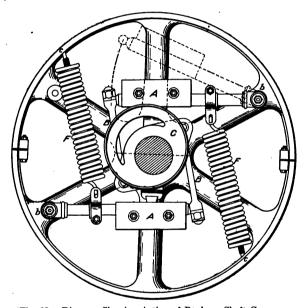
Diagram Showing Action of Buckeye Shaft Governor
